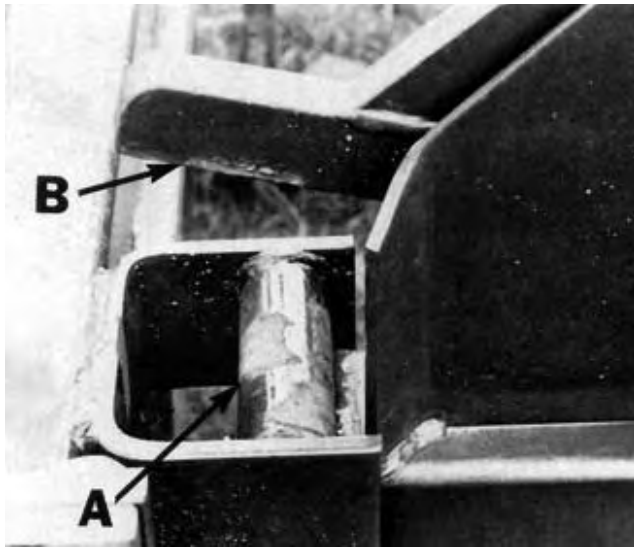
Worn Bumper Pin: (A) Bumper Pin, (B) Rockshaft Arm.
